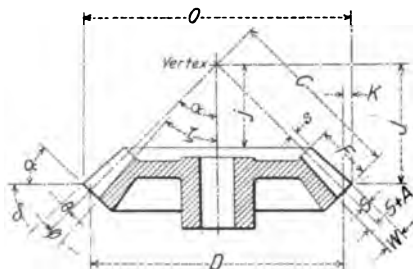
Dimensions, Definitions and Reference Letters for Ordinary Bevel Gear
